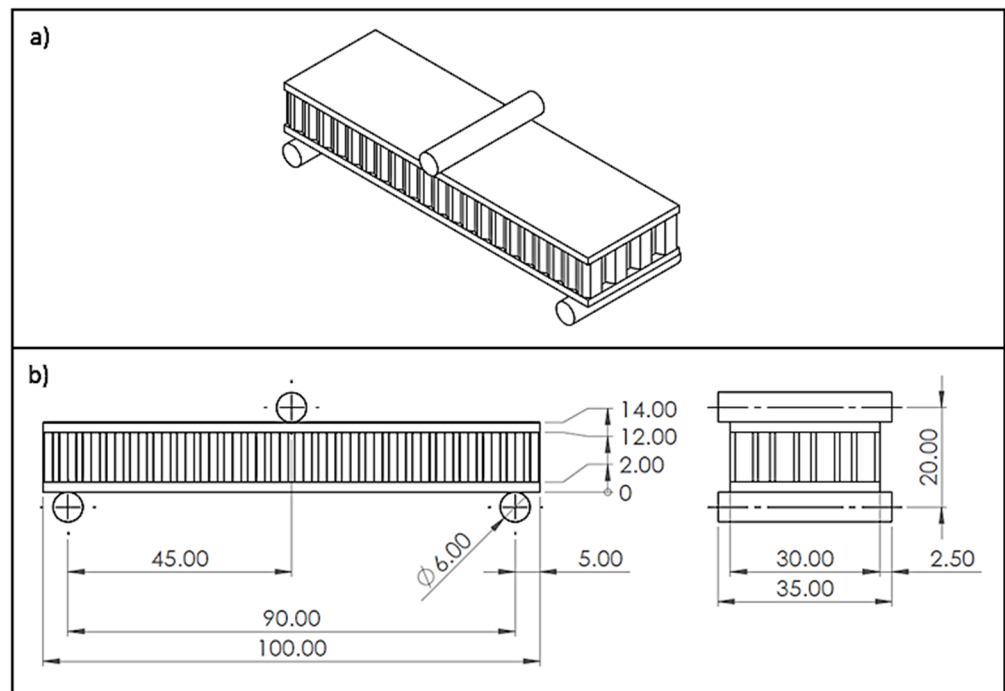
(a) Isometric view of the setup used in the simulation; (b) Dimensioned layout of the simulation with two different views (all dimensions are in mm).
